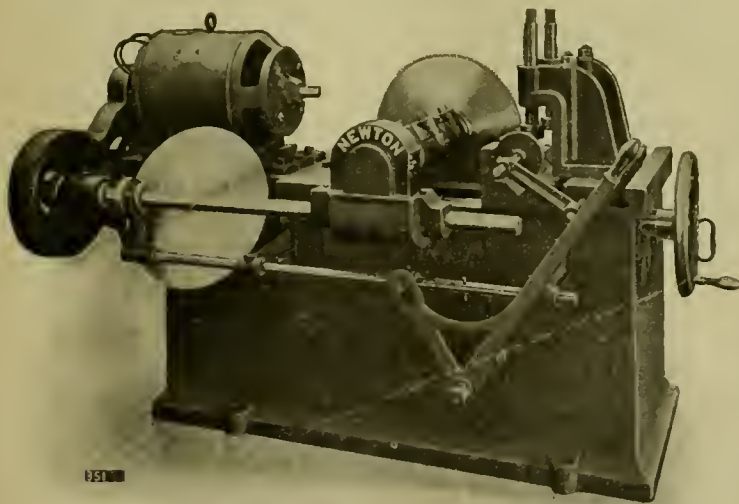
DIRECT GEARED MOTOR DRIVE UPON A COLD-SAW CUTTING-OFF MACHINE.—NEWTON MACHINE TOOL COMPANY.
